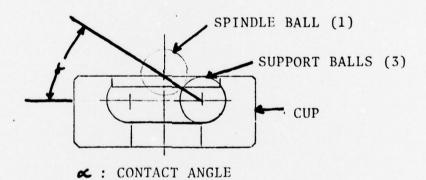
Schematic Drawing Showing the Relative Positions of Test and Support Balls
